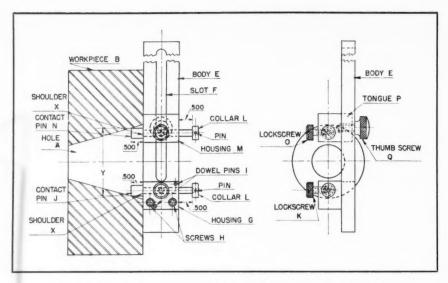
Drawing of an improved tool for measuring tapered hole diameters.
